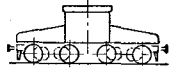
VIEW SHOWING ARRANGEMENT OF MOTORS OVER DRIVING AXLES FOR LOCOMOTIVE ILLUSTRATED IN FIG. 28
